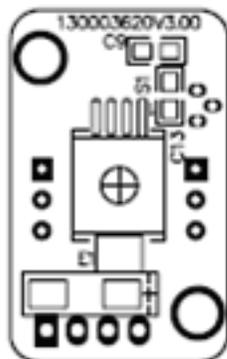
Paw Pressure Sensor Board, Bottom View
